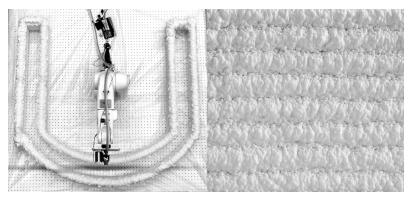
Additive fabrication tests using polyurethane spray foam with a KUKA six-axis arm (left) produced test insulative formwork samples with consistent and tunable layer heights (right)
